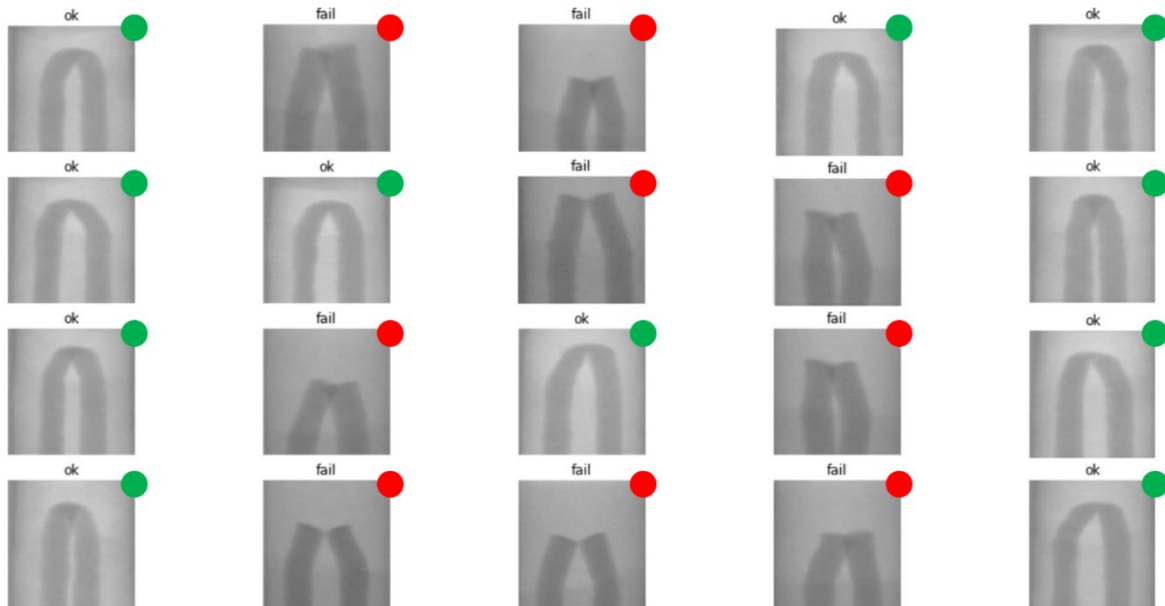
An AI model evaluates the welding of two wires. Implementing this task can with conventional image processing would require great effort and many parameter settings. With AI, the inspection is carried out with just a few clicks. (source: GÖPEL electronic)
